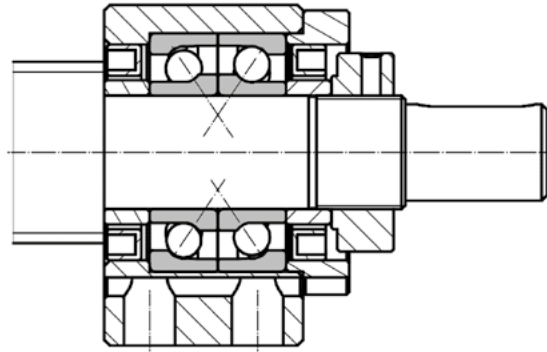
Bearing arrangement DF in fixed bearing units BK and EK
